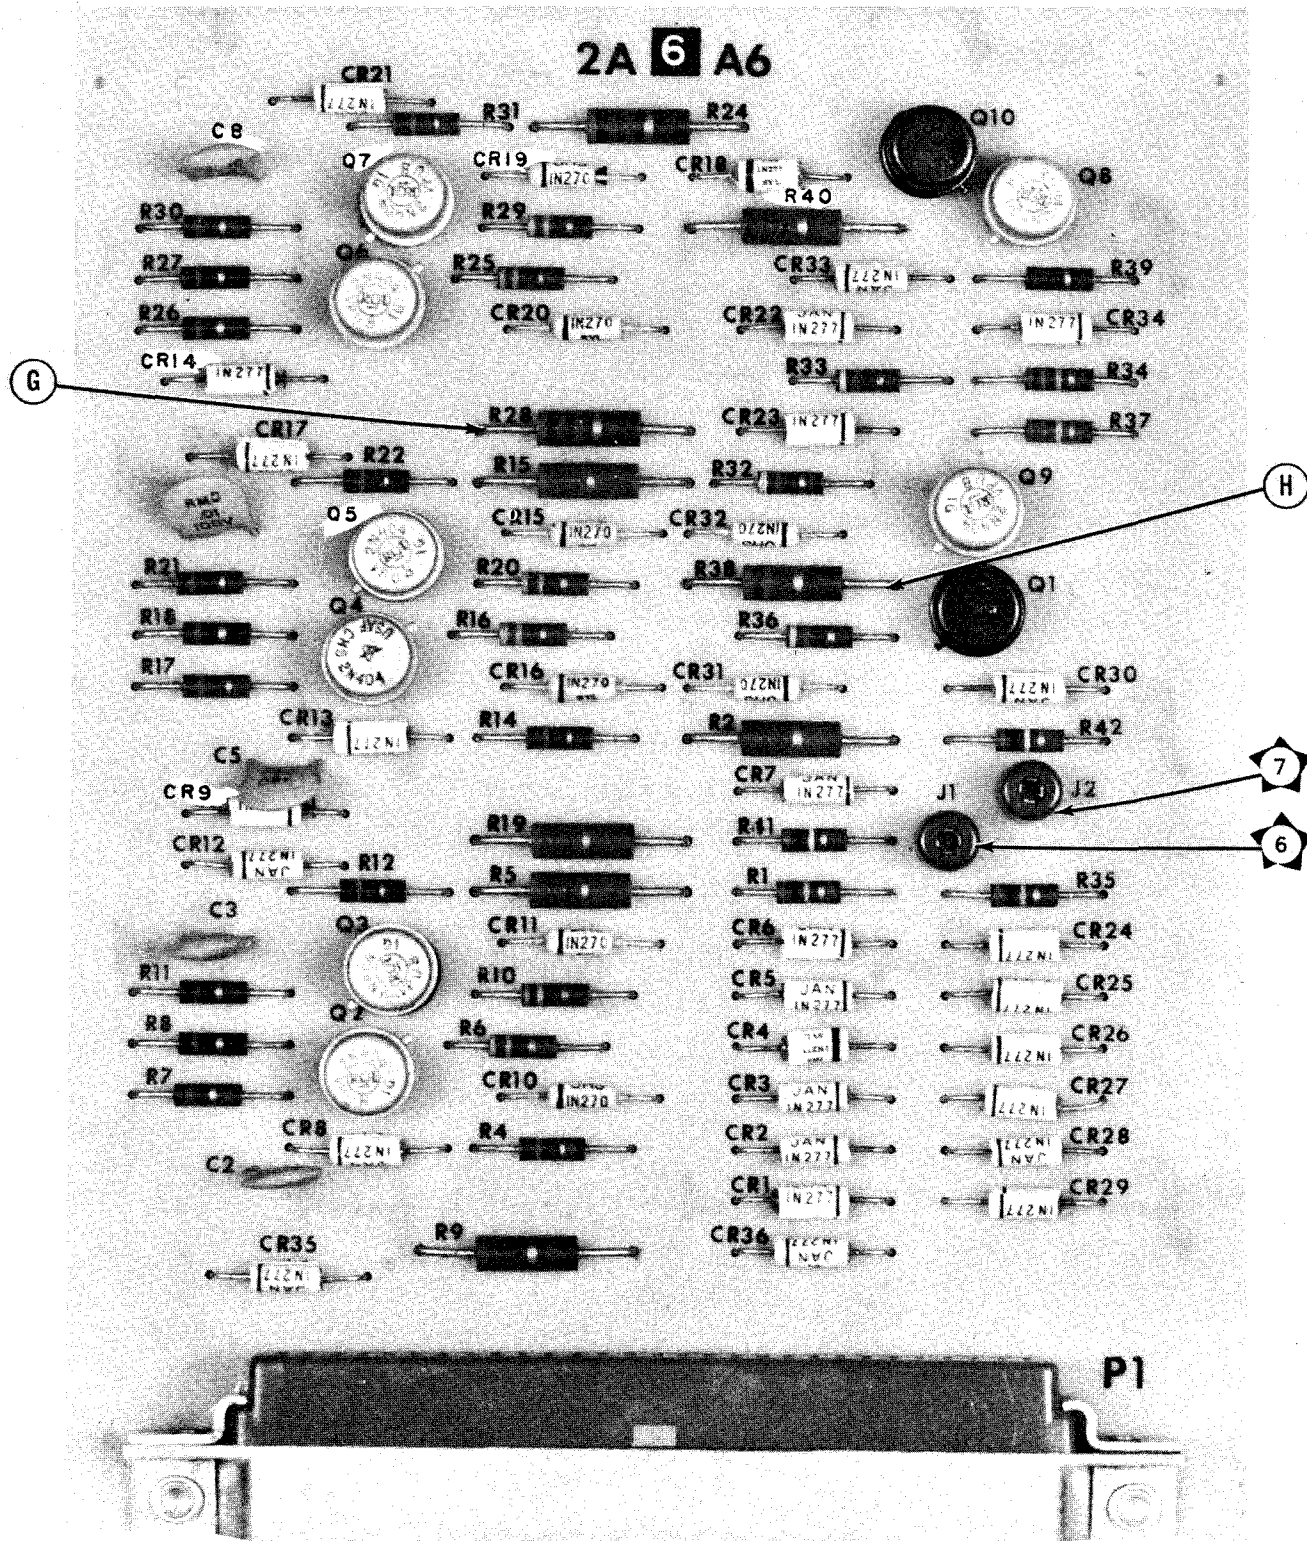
Receiver Code Converter, Printed Circuit Board A6
